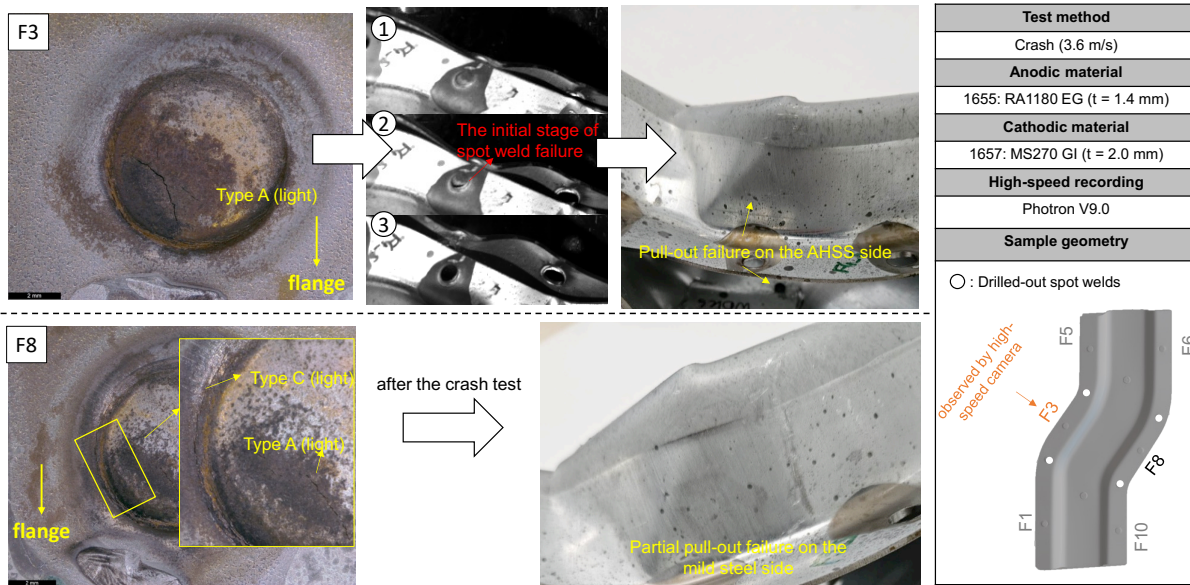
Spot weld failure in sample 39 (MTC6)
